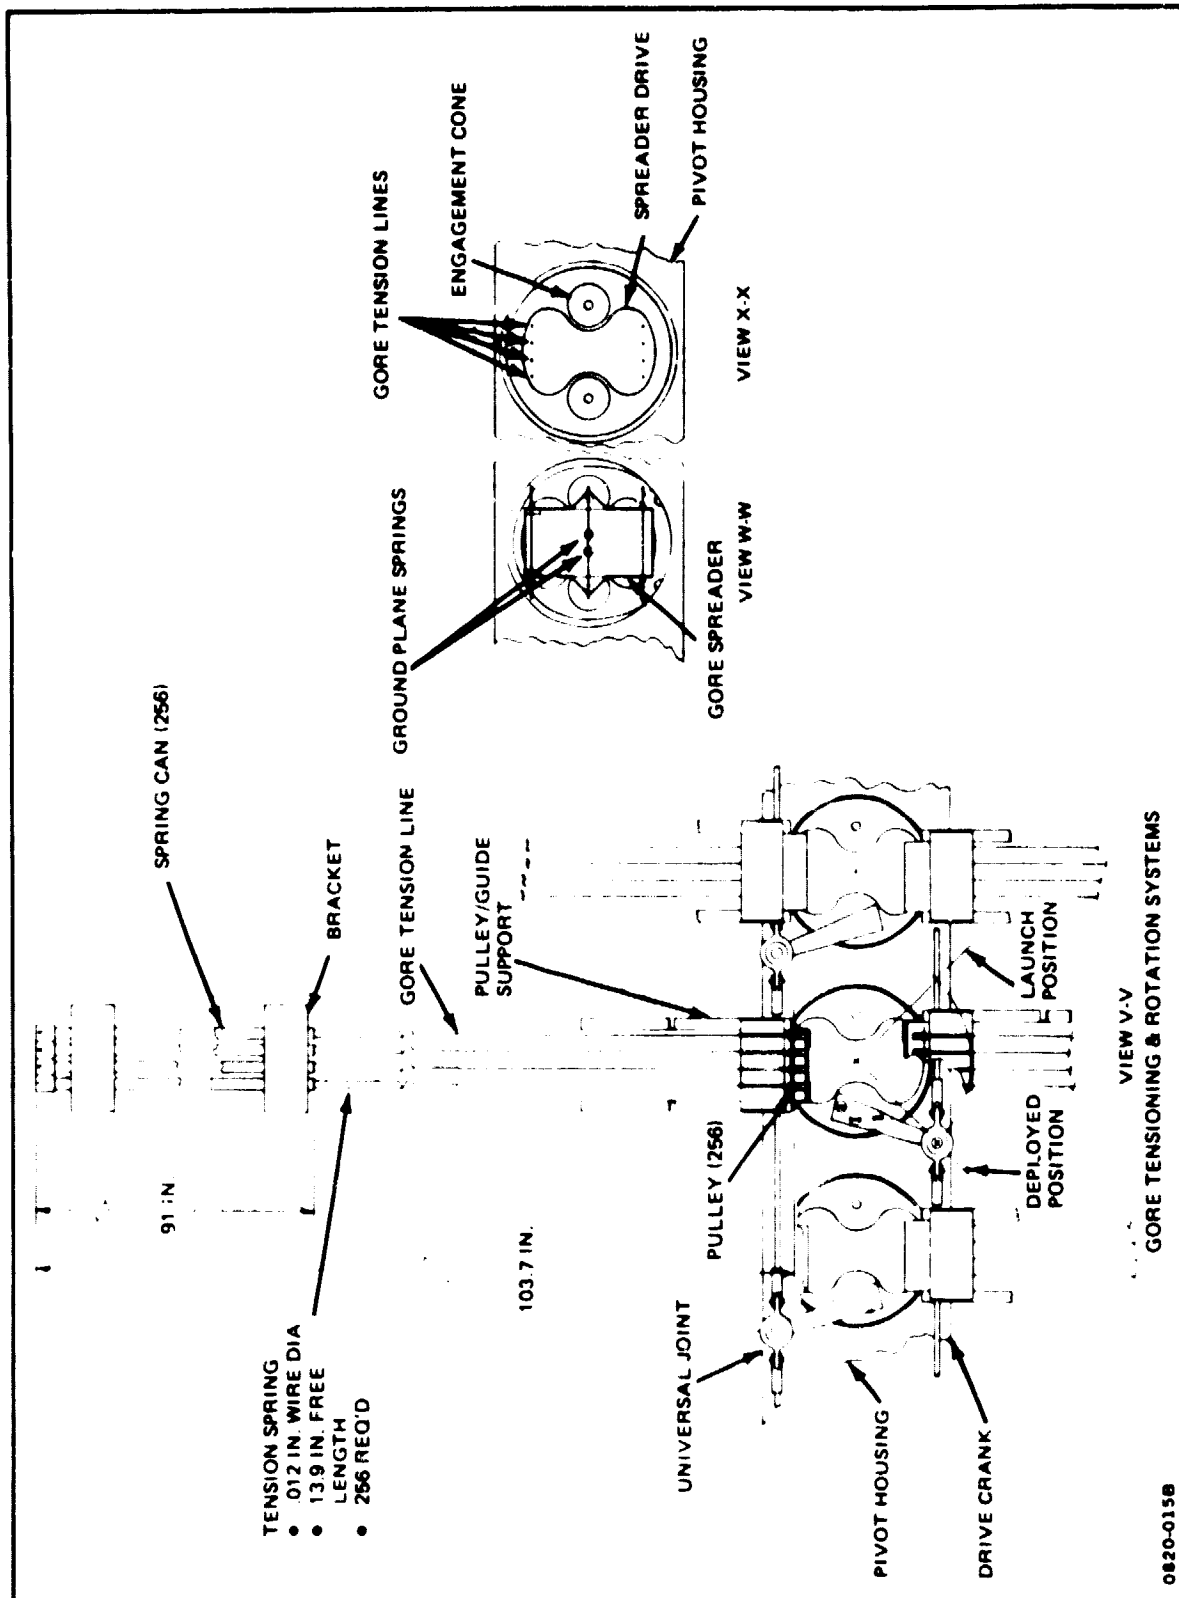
1 Aluminum Foil Three-Plane Gore (Sheet 3 of 3)
